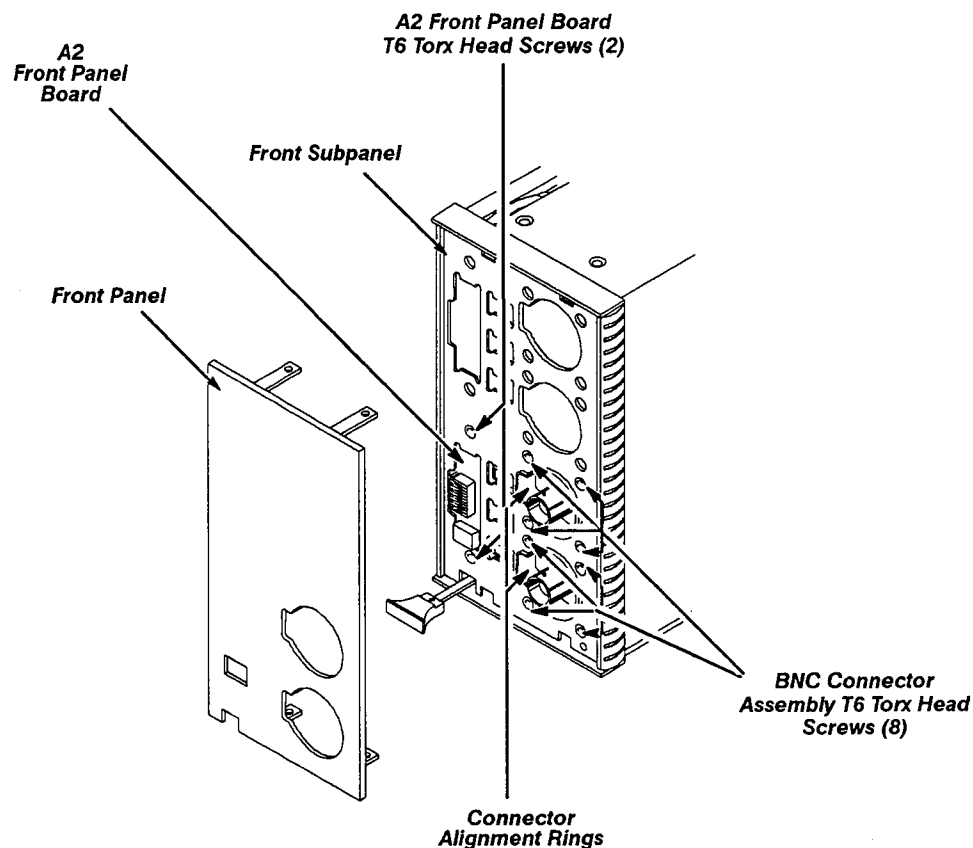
Removing/Replacing the BNC Connector Assembly and the A2 Front Panel Board
